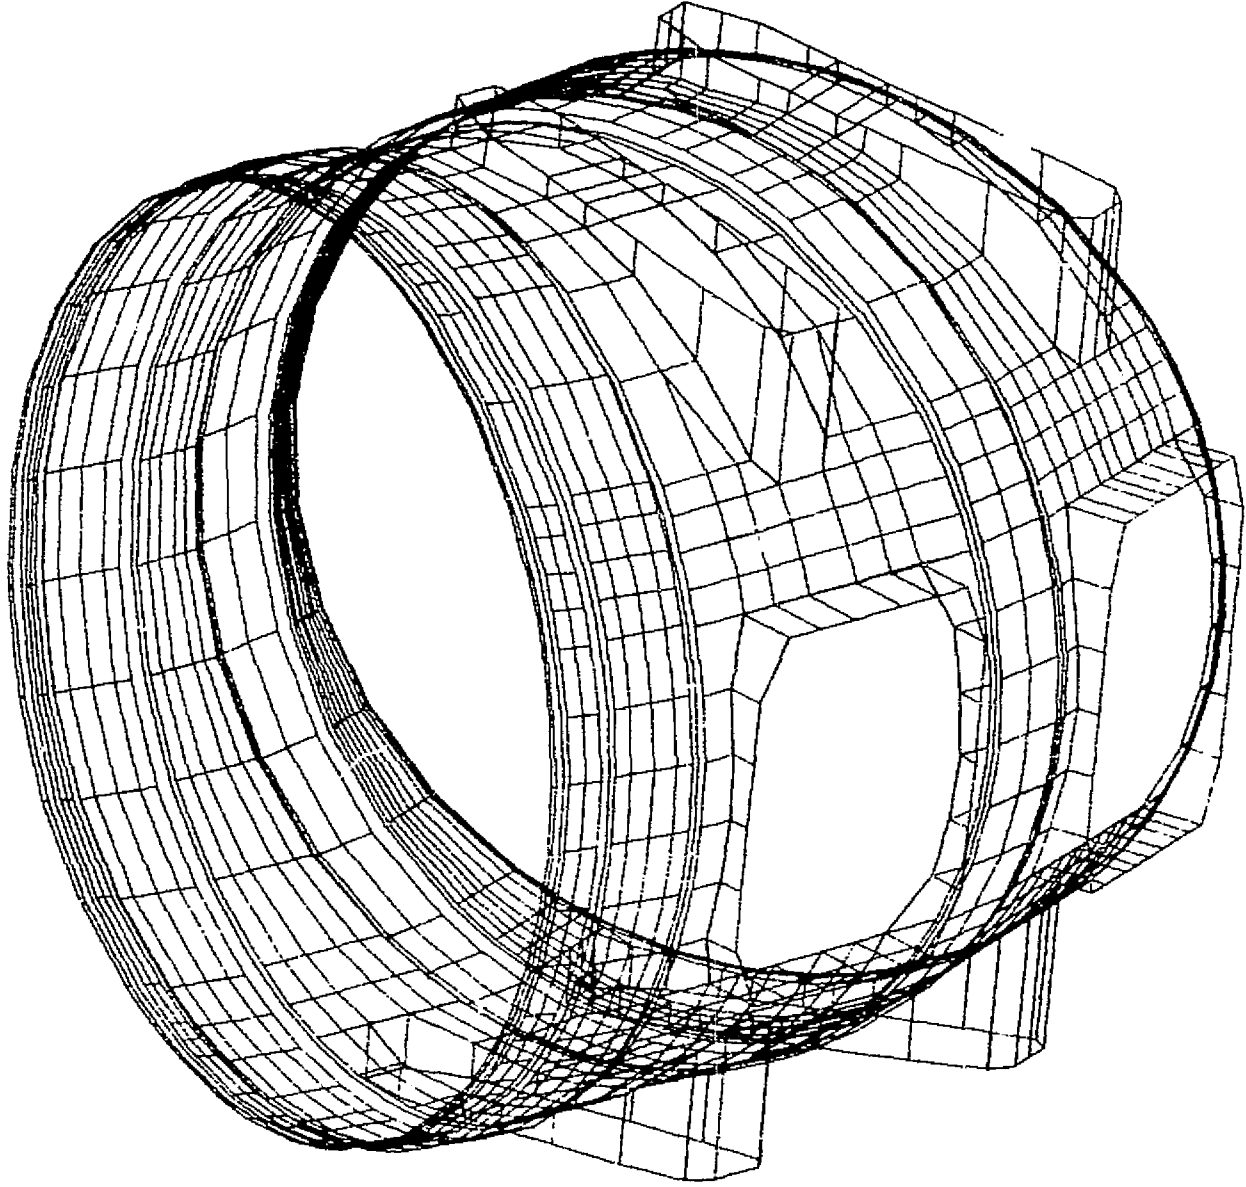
Tokamak Fusion Test Reactor - Vacuum Vessel
